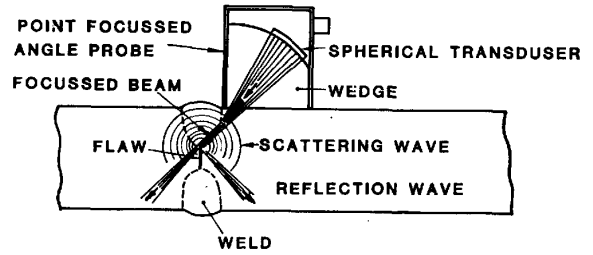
Measurement of size of defect in weld by point focussed angle probe.
